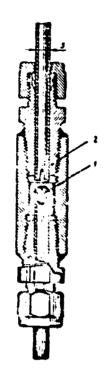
Ball feed valve for a sodium pipeline, dy = 3 mm.
